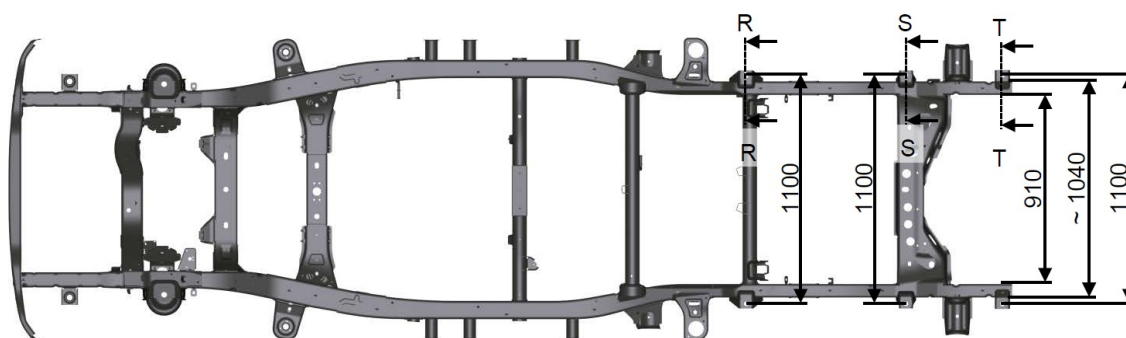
Plan view of ladder frame AMAROK DC
